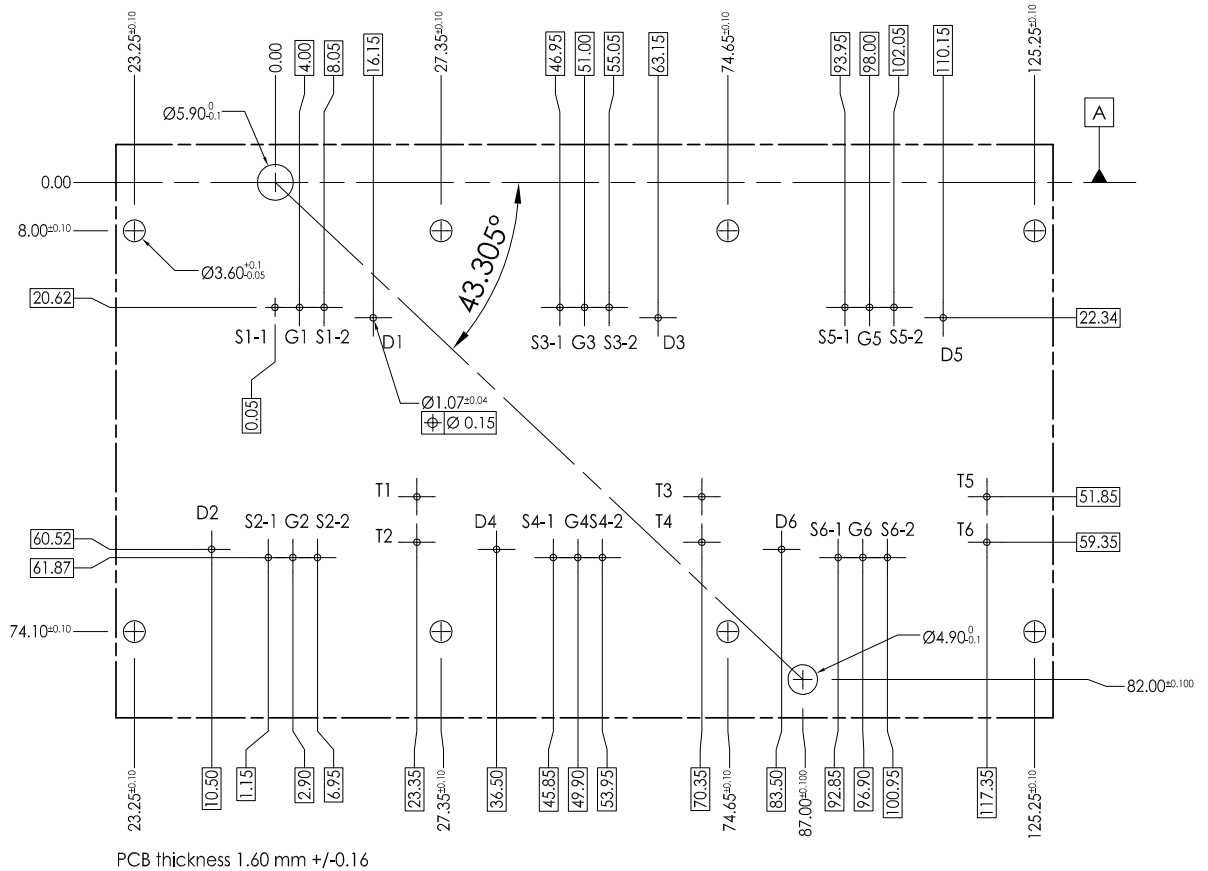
ACEPACK DRIVE PCB drawing (dimensions are in mm.)
